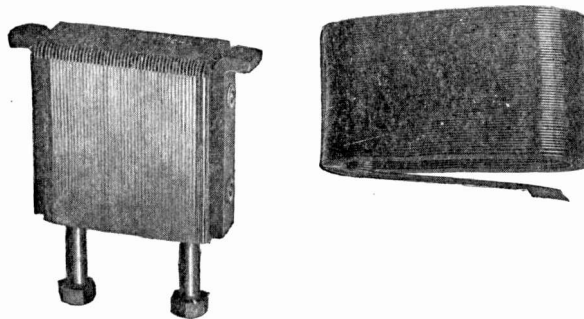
Laminated Pole-Piece and Strip-Wound Field Coil for Rotor of Fig. 172
